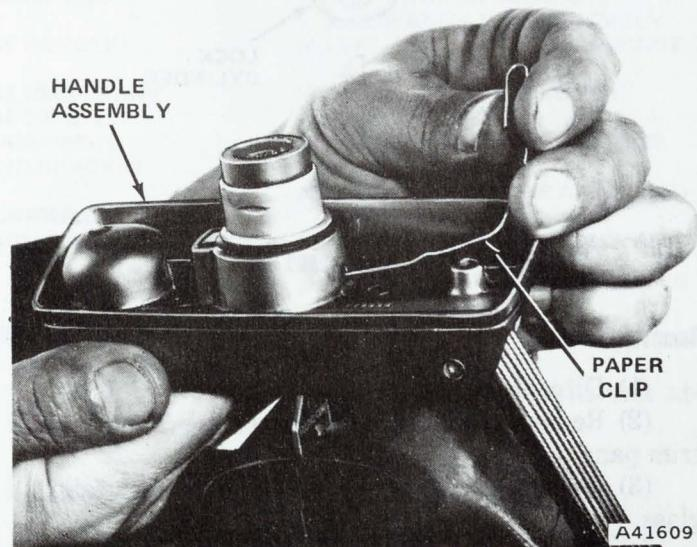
H-28 Removing Lock Cylinder from Handle Assembly
